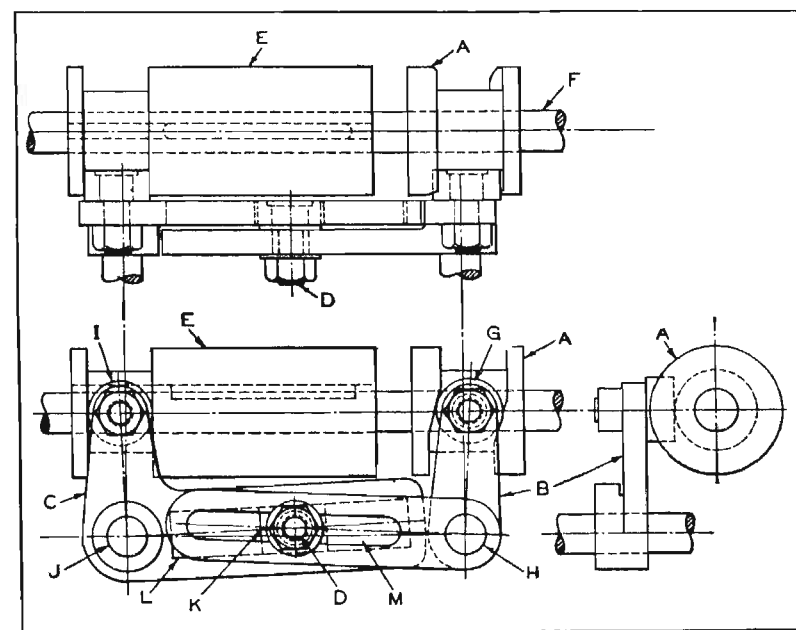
Mechanism for Reciprocating Cylinder E on Shaft F.
